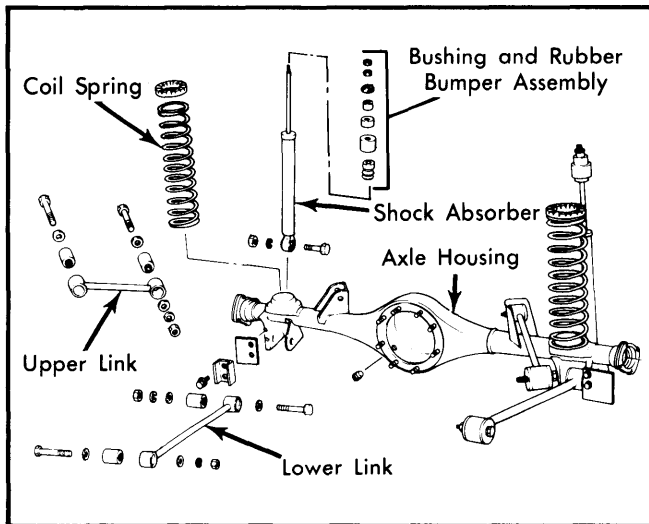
Exploded View of Datsun 210 & 510 Rear Suspension
